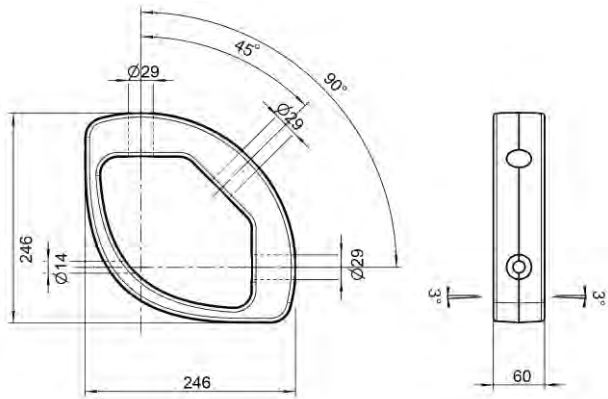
Inner cast-steel frame structure (Prototype)
